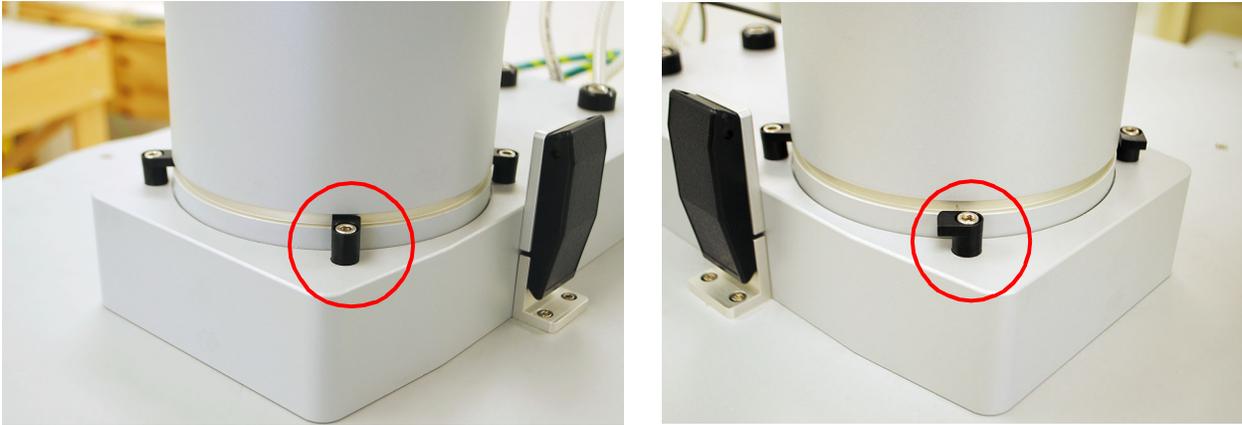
head cover clamp securing the head (left); clamp turned away from the head (right).
